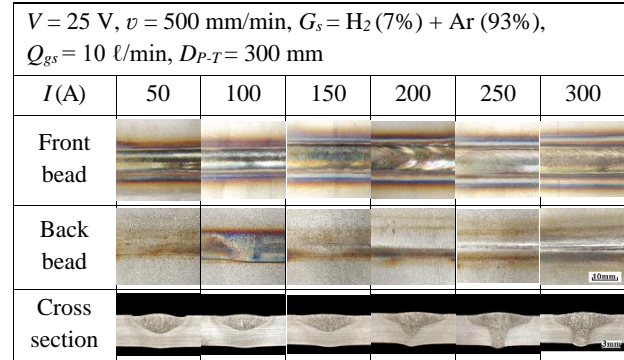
Photographs of bead appearance and cross-section in PAW and TIG processes
